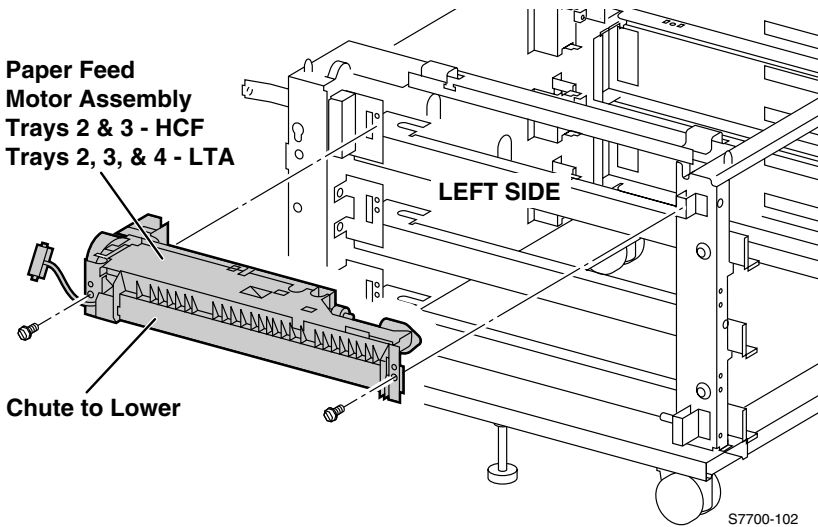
Paper Feed Motor Assembly and Chute (LTA & HCF)
